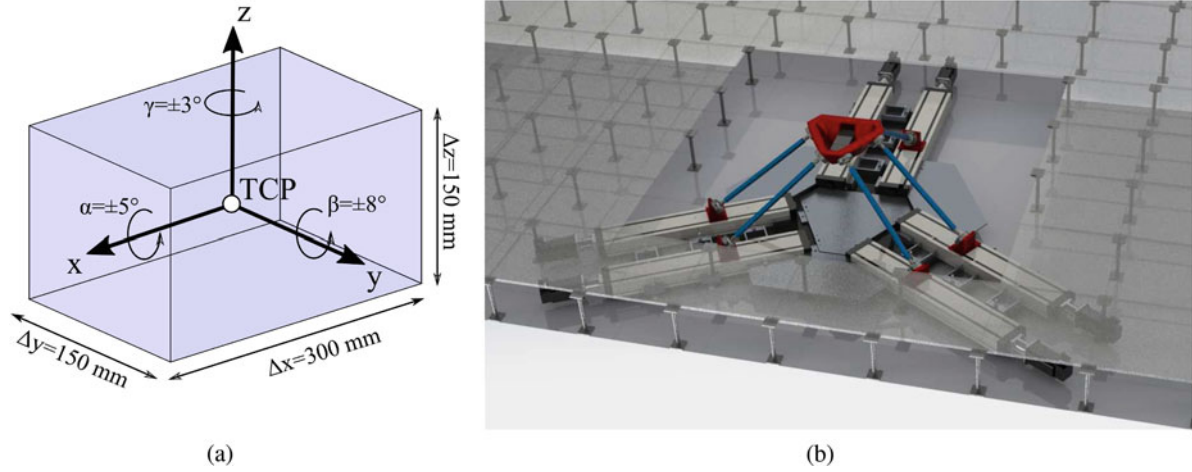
Desired workspace and first machine design. (a) Workspace. (b) First machine design
